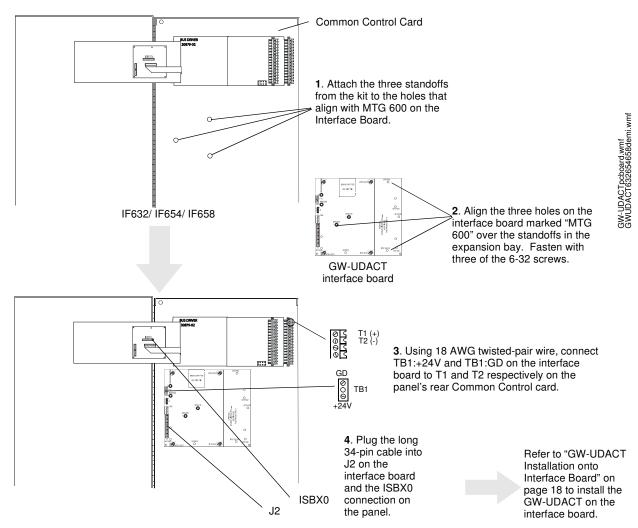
IF 632, IF 654, or IF 658 Installation
